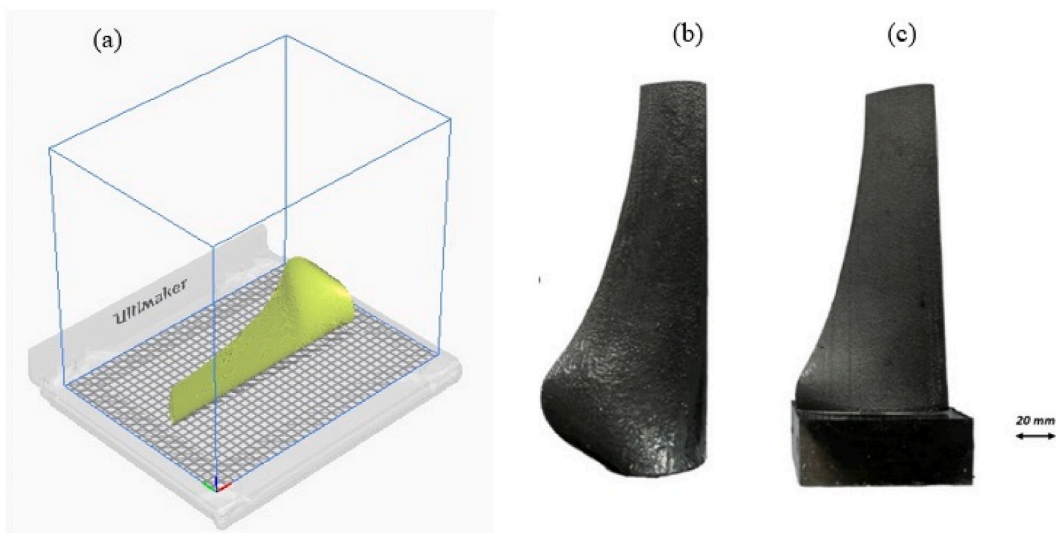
(a) Machine code model of blade in FFF 3D printer. (b) 3D printed blade, (c), Mounted 3D printed blade in a cube box of cured resin to facilitate fixing in the flexural testing rig.
